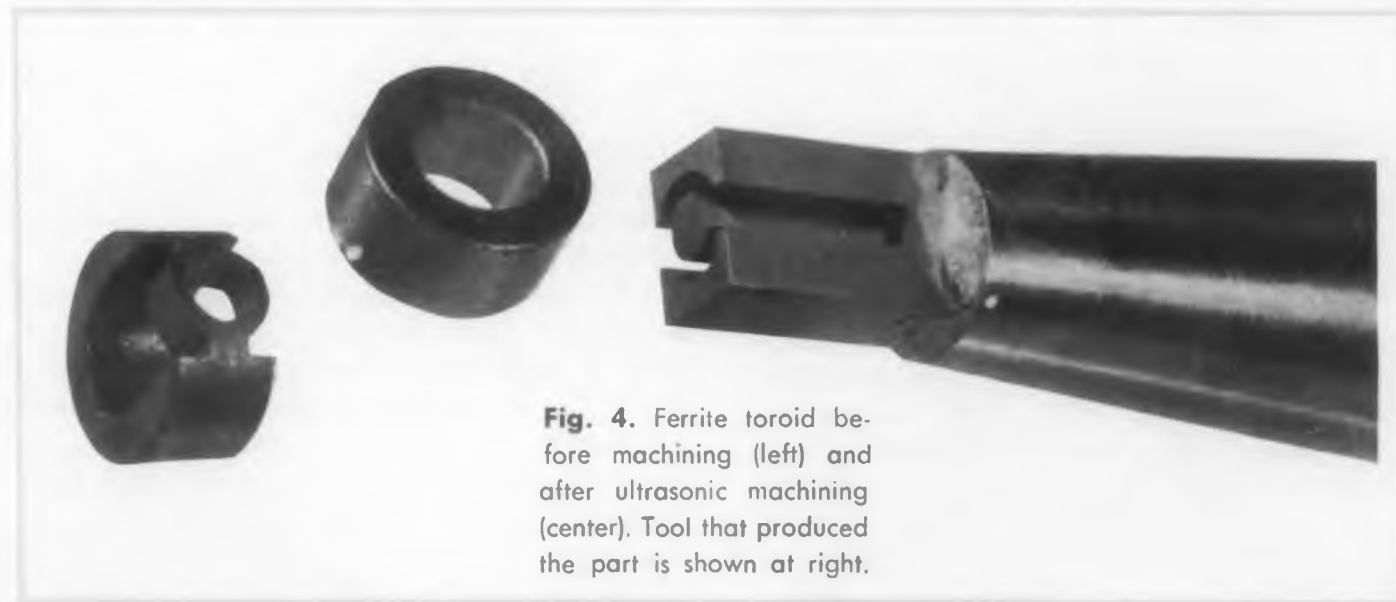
Ferrite toroid before machining (left) and after ultrasonic machining (center). Tool that produced the part is shown at right.
